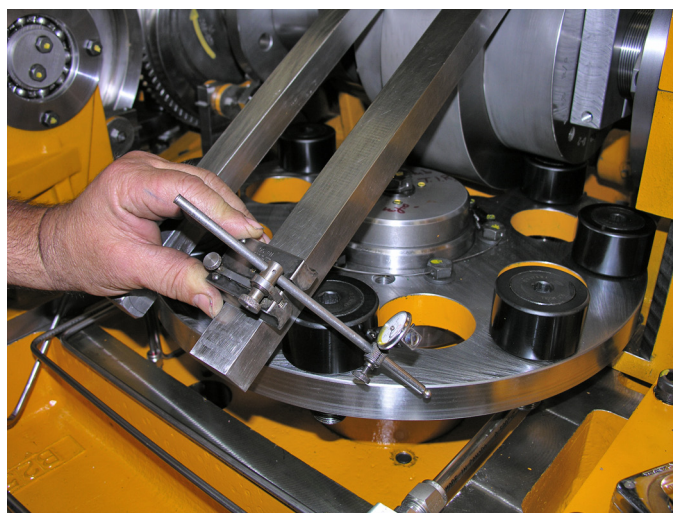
INDICATOR READING ON RIGHT SIDE OF FOLLOWER
